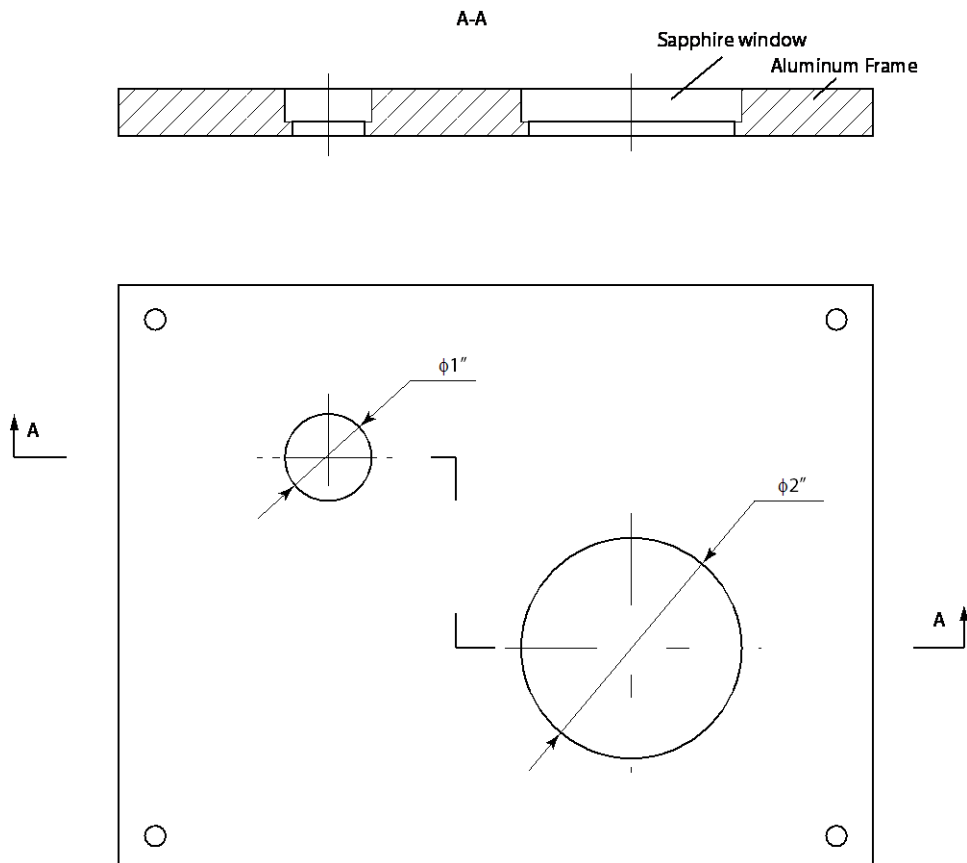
Assembly drawing of the top cover of the vacuum chamber.
